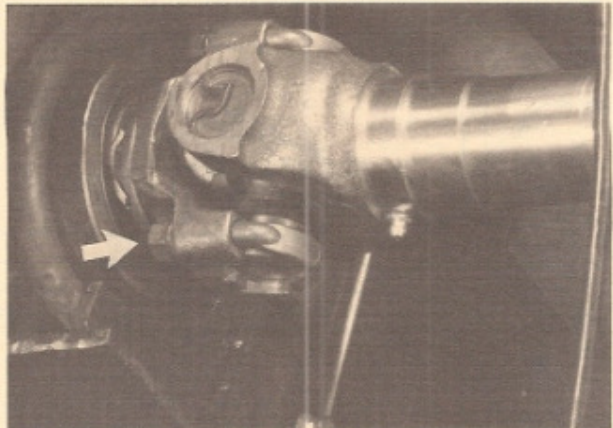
AXLE SHAFT REMOVAL – Disconnect both axle shafts at the differential by removing four (4) nuts from the two (2) "U" bolts at each universal.
